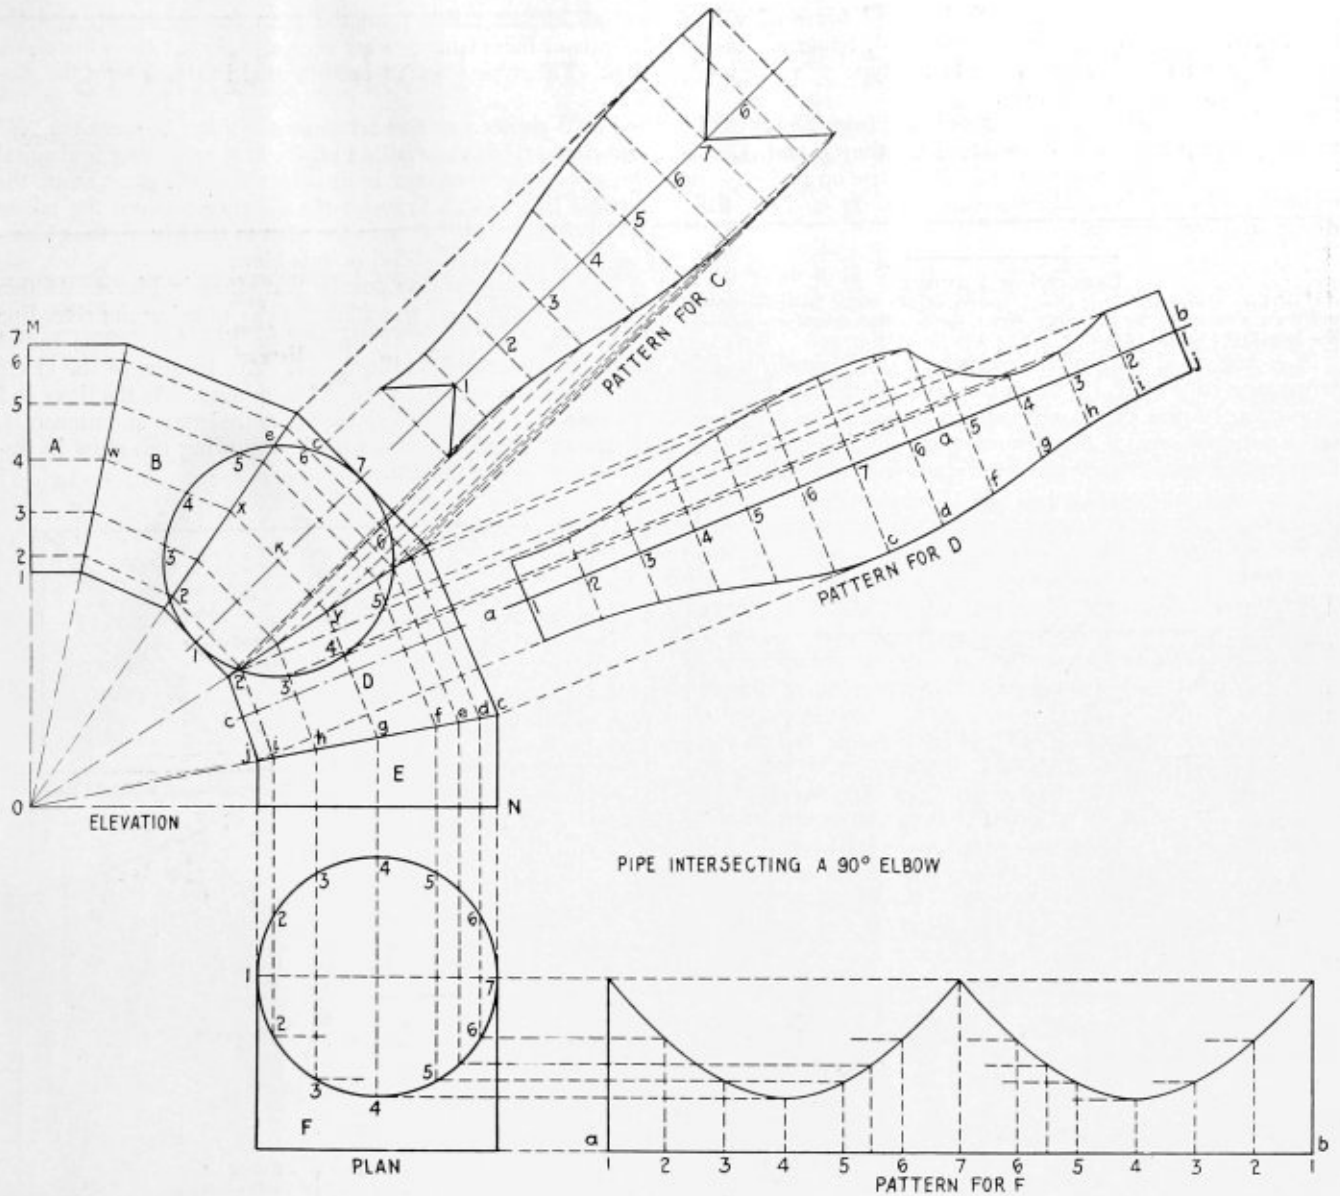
Complete Layout of Elbow Intersected by a Cylinder, Showing in Convenient Manner the Principles of Projection
